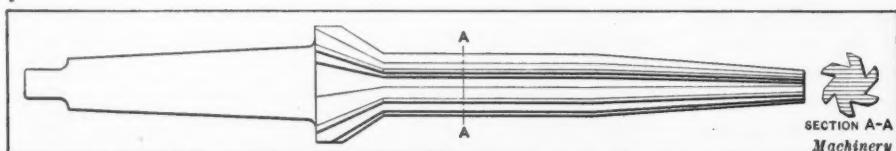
Combined Reamer and Countersink used to insure that Conical and Straight Sections of Rivet Hole are Concentric
